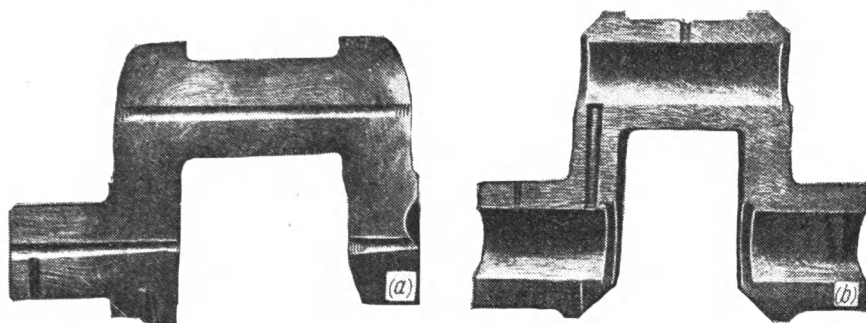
Macrostructure of a crankshaft (after N. V. Geveling), 1/3 full size
